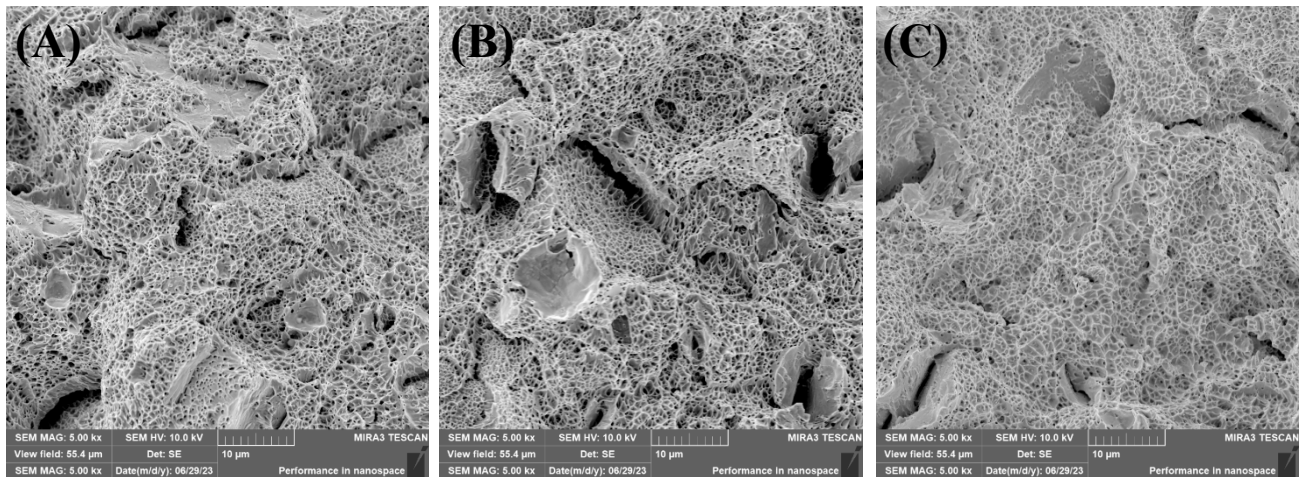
Representative tensile testing fracture surfaces for specimens built with (A) standard full power exposure, (B) double exposure at half power, and (C) double exposure at quarter power.
